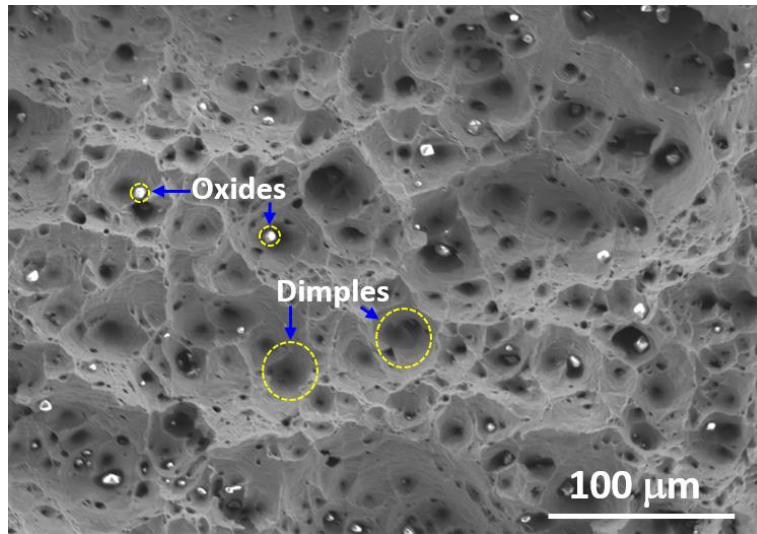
Fracture surface of the CoCrFeMnNi gas metal arc welded joint with ER410-NiMo filler.
